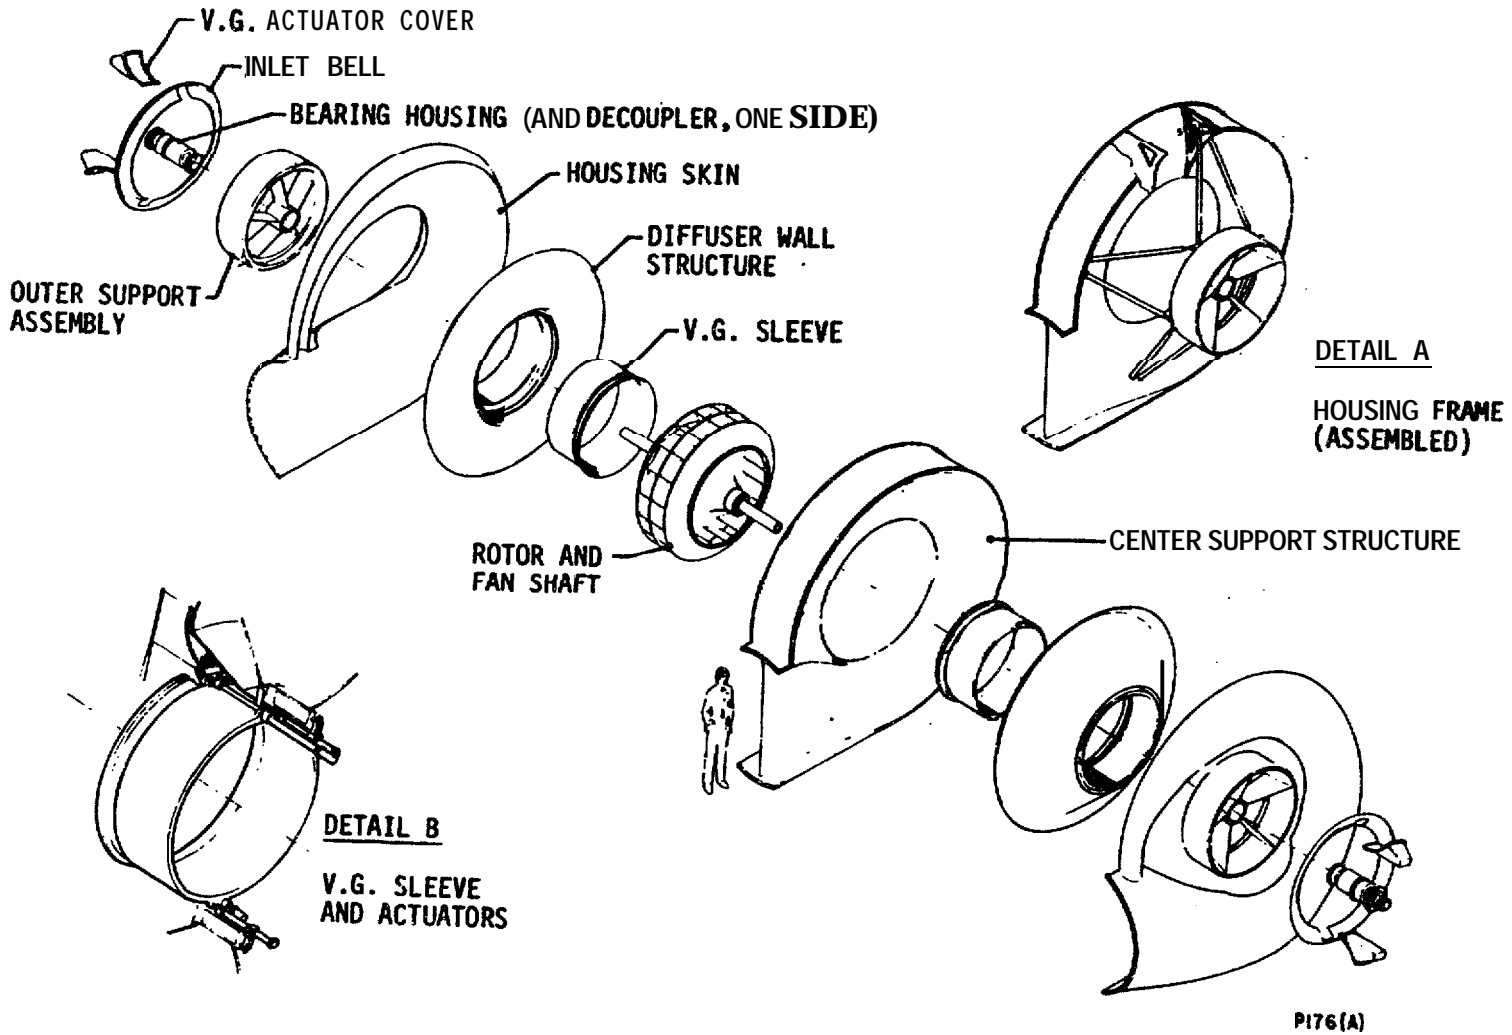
CUSHION FAN - EXPLODED VIEW
